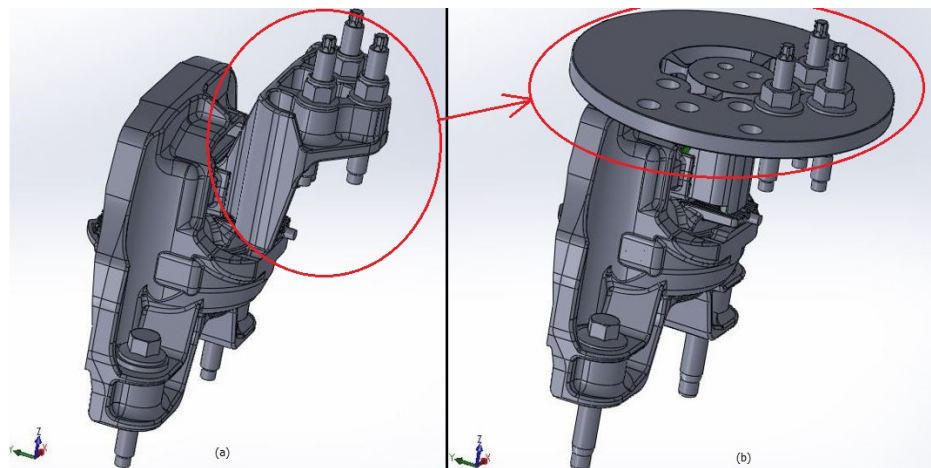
(a) Right Hand Side (LC2) engine mount is shown; (b) the bracket between the engine mount and the engine is replaced with the proposed load cell.
